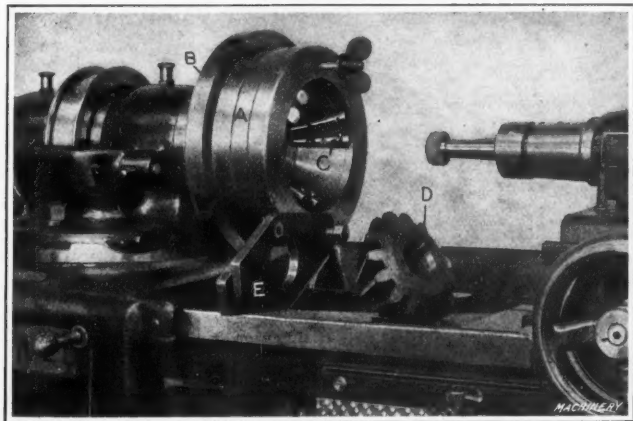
Another Chuck for holding Bevel Pinions when grinding Hole
